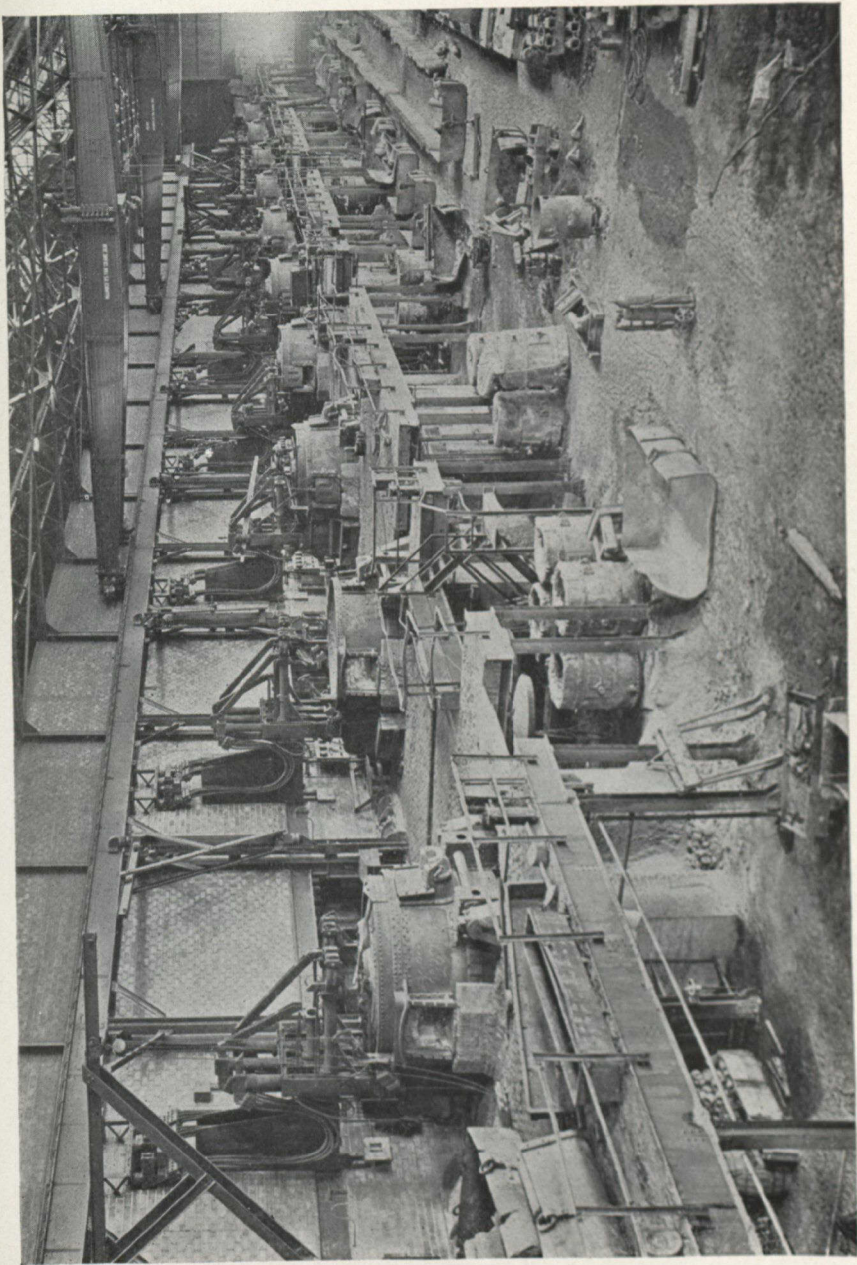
British Forgings, Toronto. Electric Furnaces.
